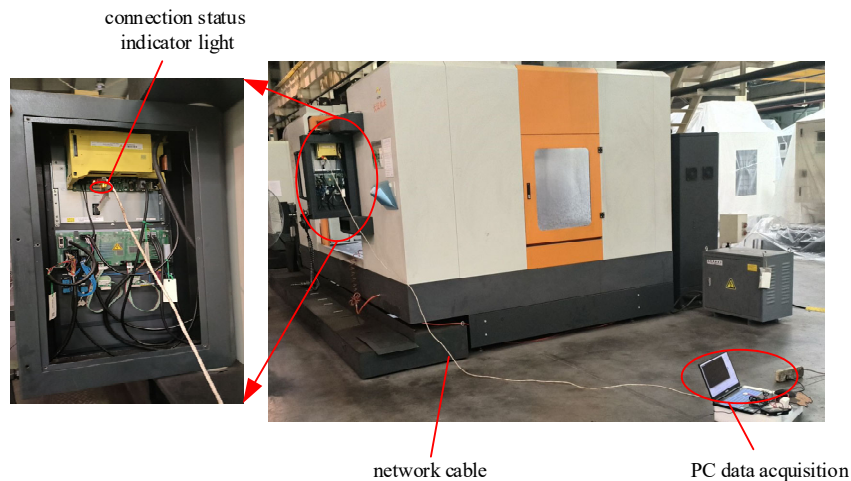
Data Acquisition Experimental Platform for CNC Machine Tools
